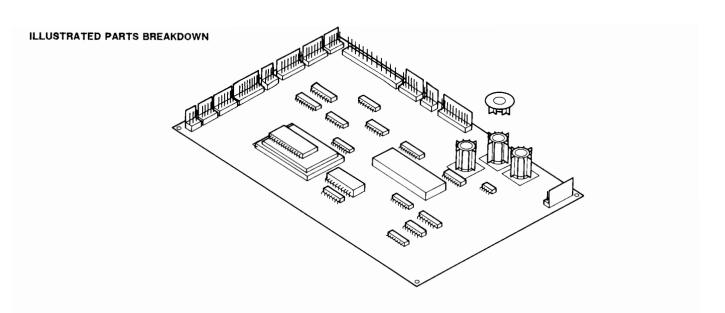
DC Power Supply/Main Motor Driver PCA
